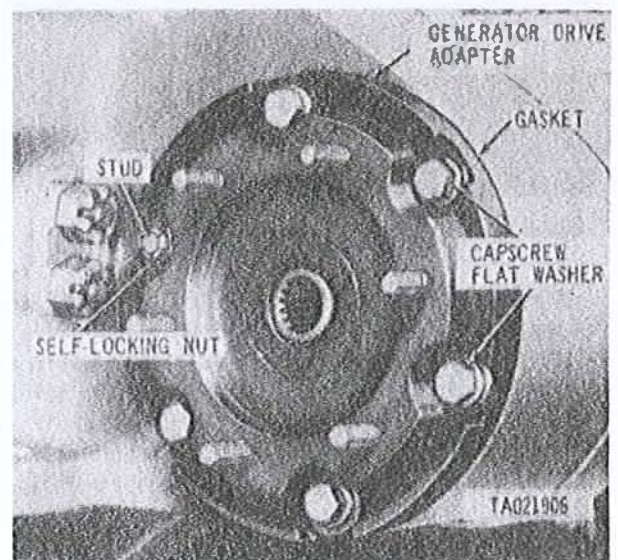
Removing or installing generator drive adapter, model AVDS-1790-2D and AVDS-1790-2DR engines.
